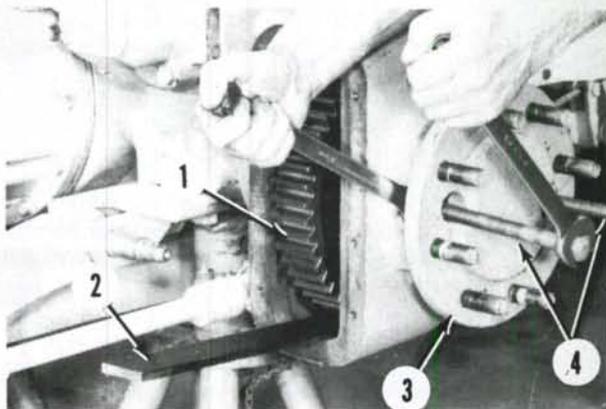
Use two jack screws (4) with flat washers and nuts through holes in stub axle flange to pull stub axle shaft from housing.
